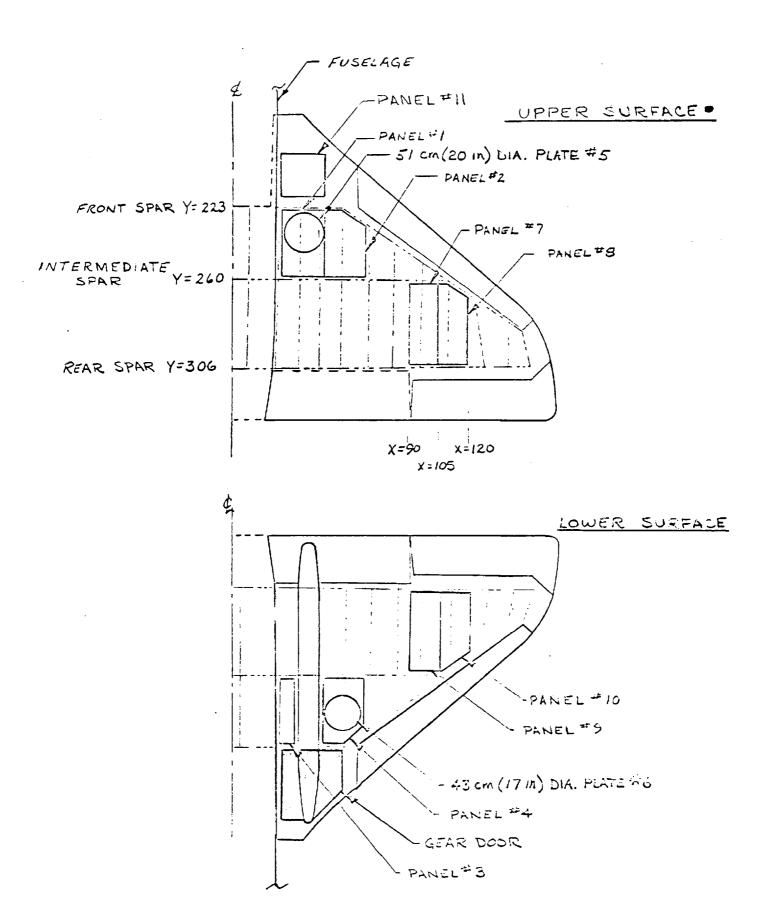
HOLE CONFIGURATION #10. GEAR DOOR LOCKED OPEN
